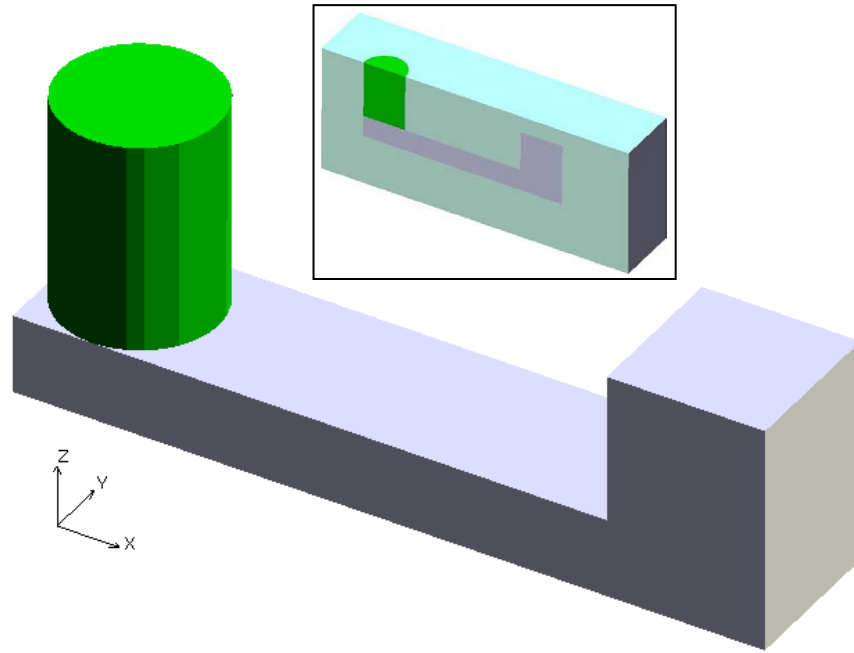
Casting geometry for the hot spot application, with an inset showing a side cross-sectional view that includes the mold.
